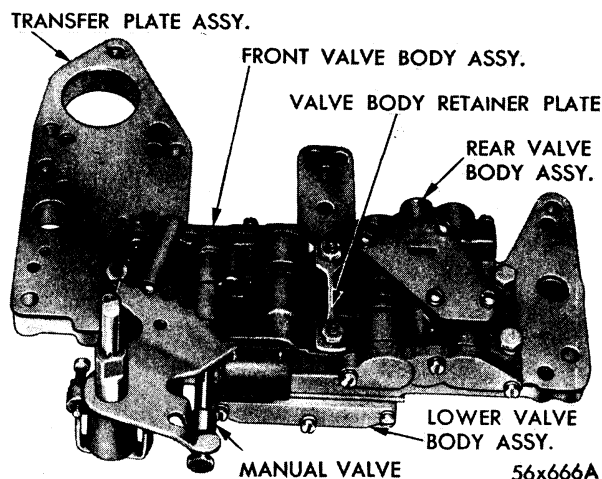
Valve Bodies and Transfer Plate Assembly (Bottom View)
